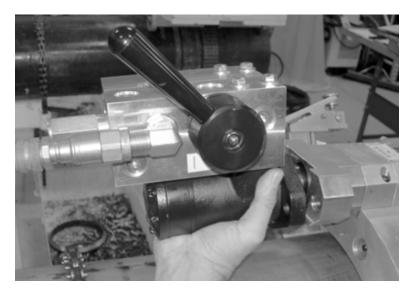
Insert the hydraulic drive shaft through the adapter so that the square drive fits into the pinion socket.
